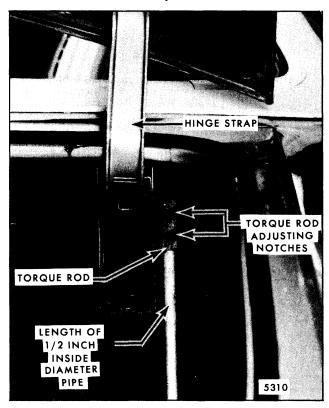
Rear Compartment Torque Rod Adjustment - "A" - Styles Shown, "B-C" and Buick "E" Style Similar
